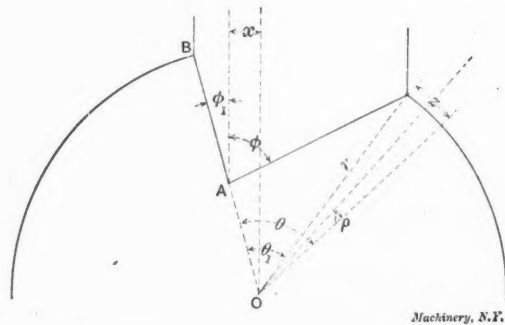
Double-angle Cutter for Milling Straight Reamer Flutes.
